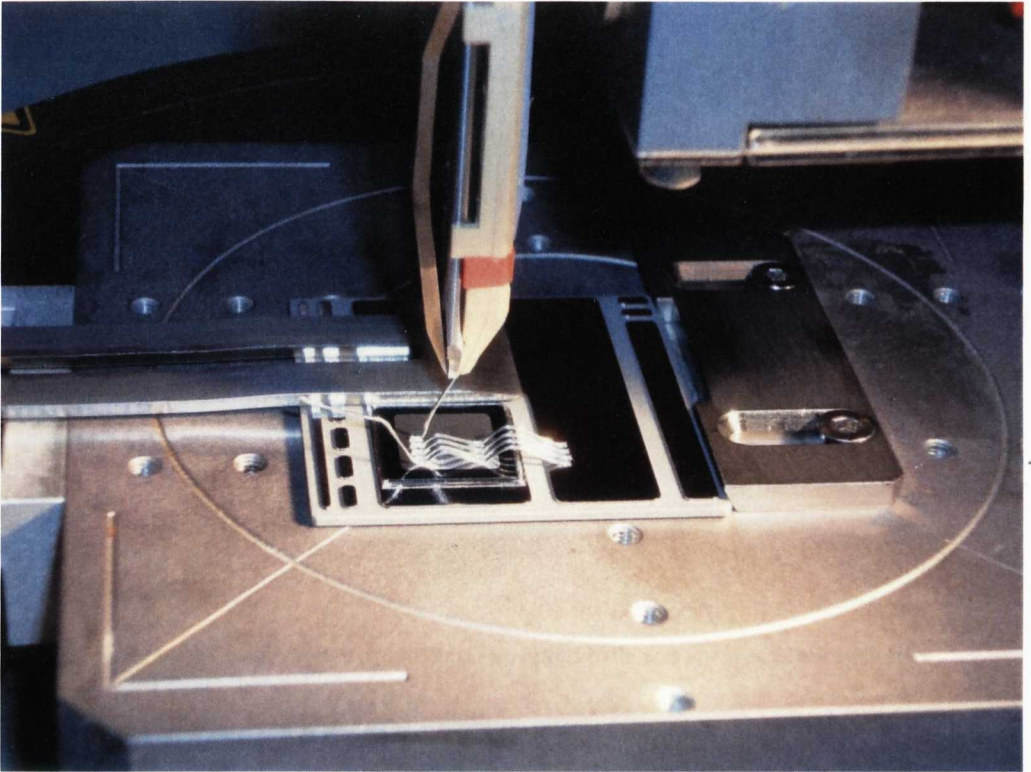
$500\mu\text{m}$ thick aluminium wires were sonically friction welded onto the device. The picture above shows the wirebonding in progress.
